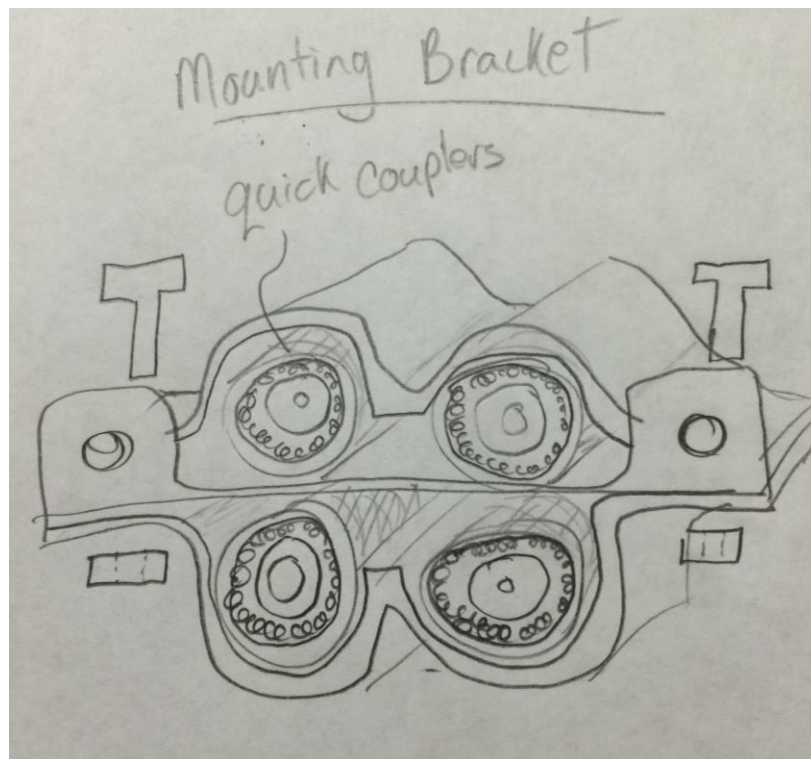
Sketch of the chosen auxiliary coupler mounting concept: "Mounting Bracket".
